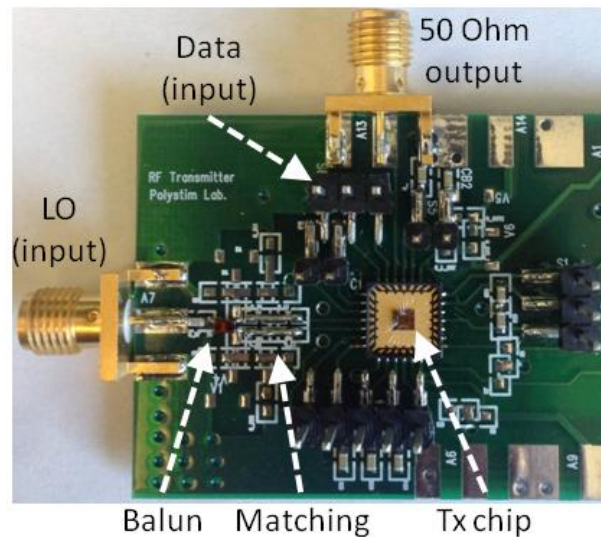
The developed Printed Circuit Board (PCB) for measurement
